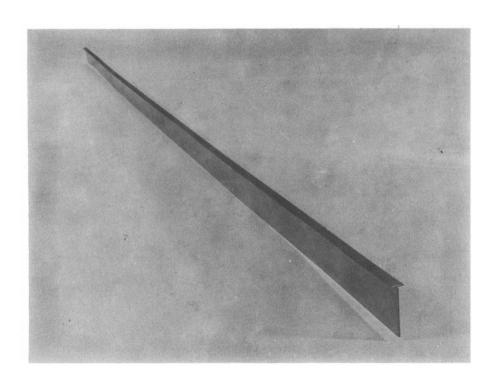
Full length piece of flat steel with one welded spacer.
